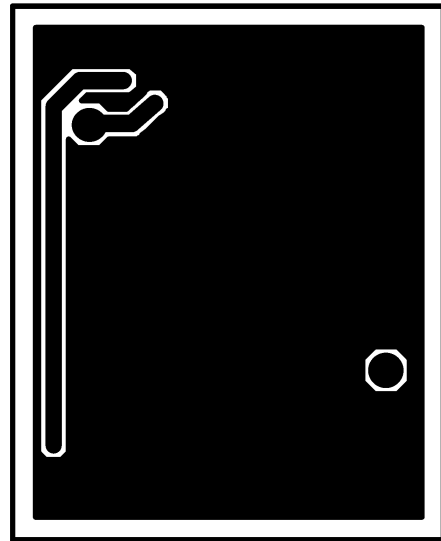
Typical PCB Layout Schematic (3.3V output)
